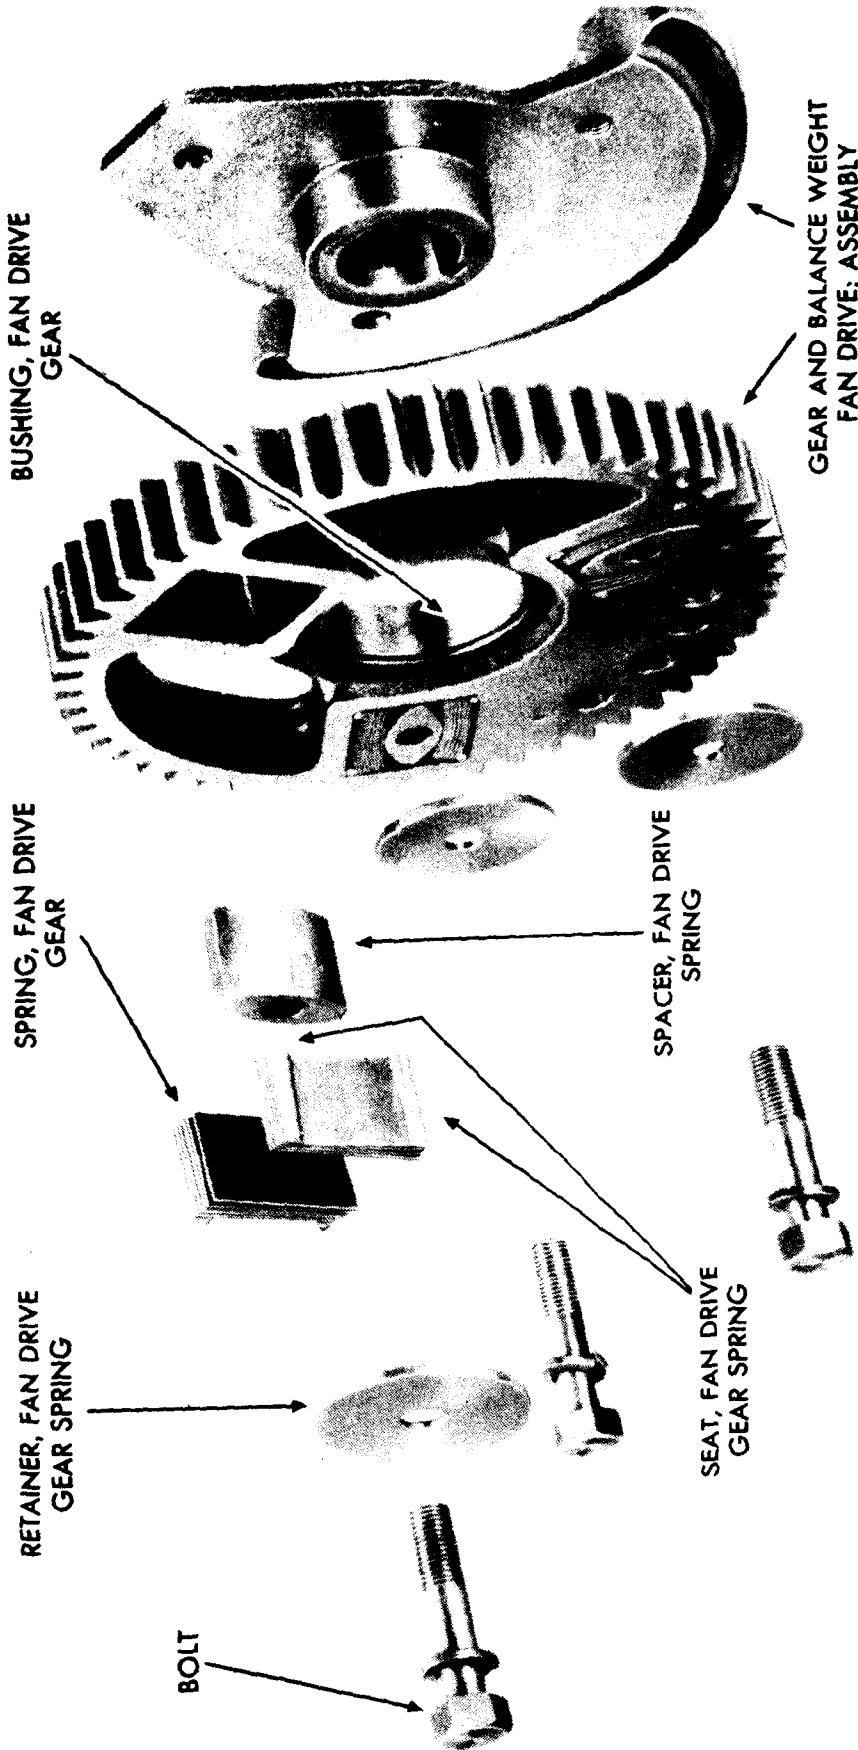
Component and Related Parts of Fan Drive Gear and Balance Weight Assembly
